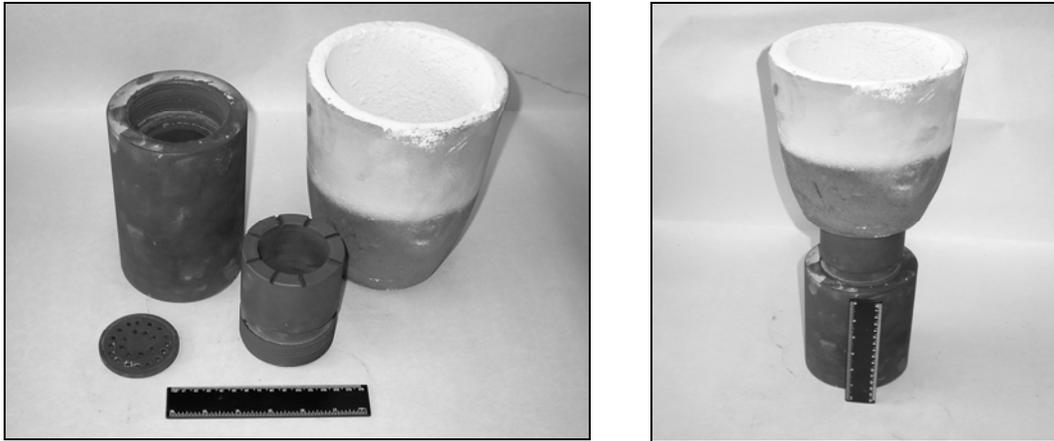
Elements of the cast assembly and the assembly prepared for melting
